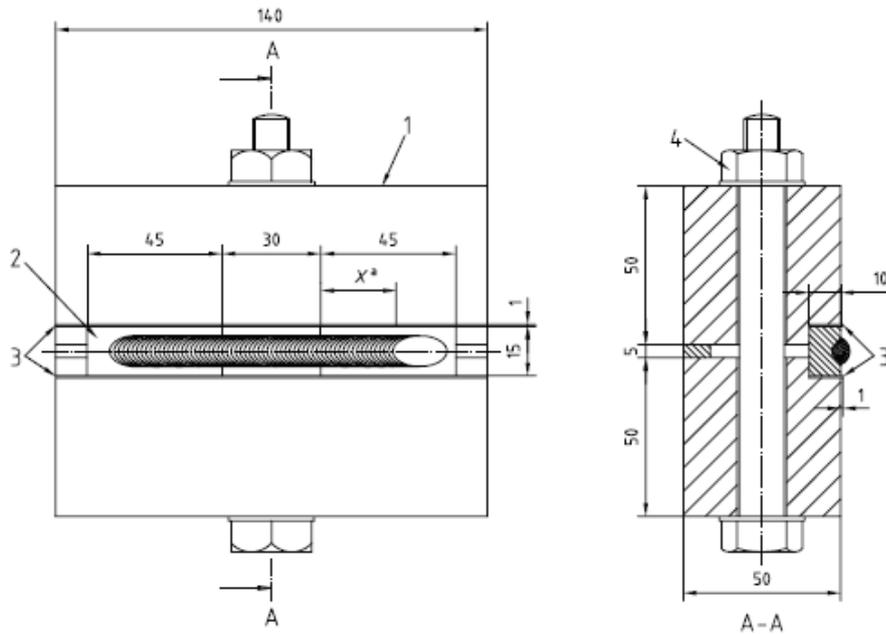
The standard diffusible hydrogen weld test jig assembly.
